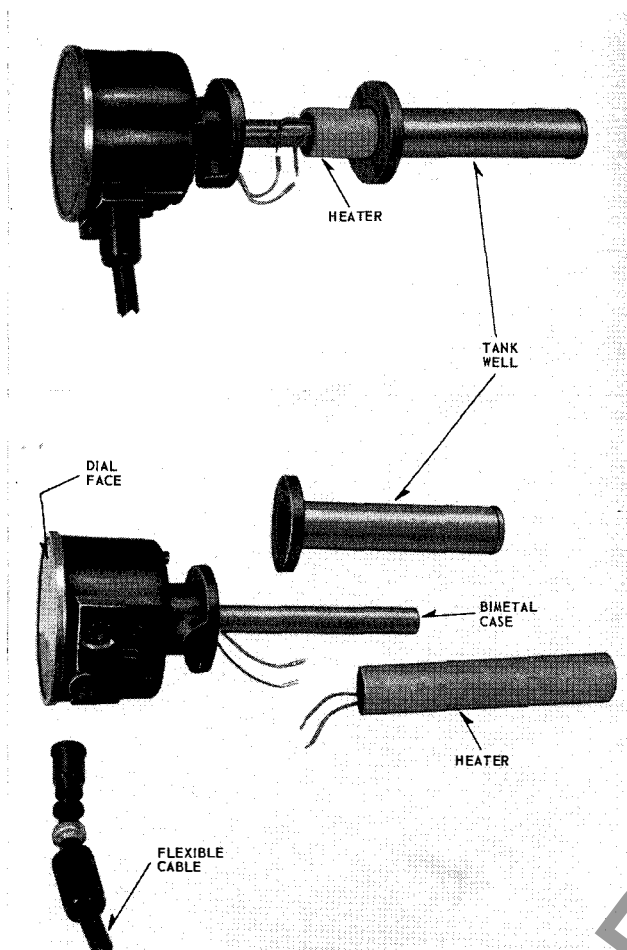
Assembly of TRO-1 relay, tank well, heater coil and cable attachment
